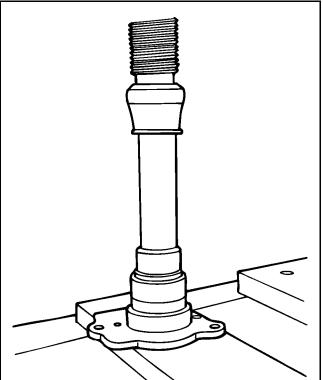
Exploded View of Front Countershaft Rear Bearing Cover
